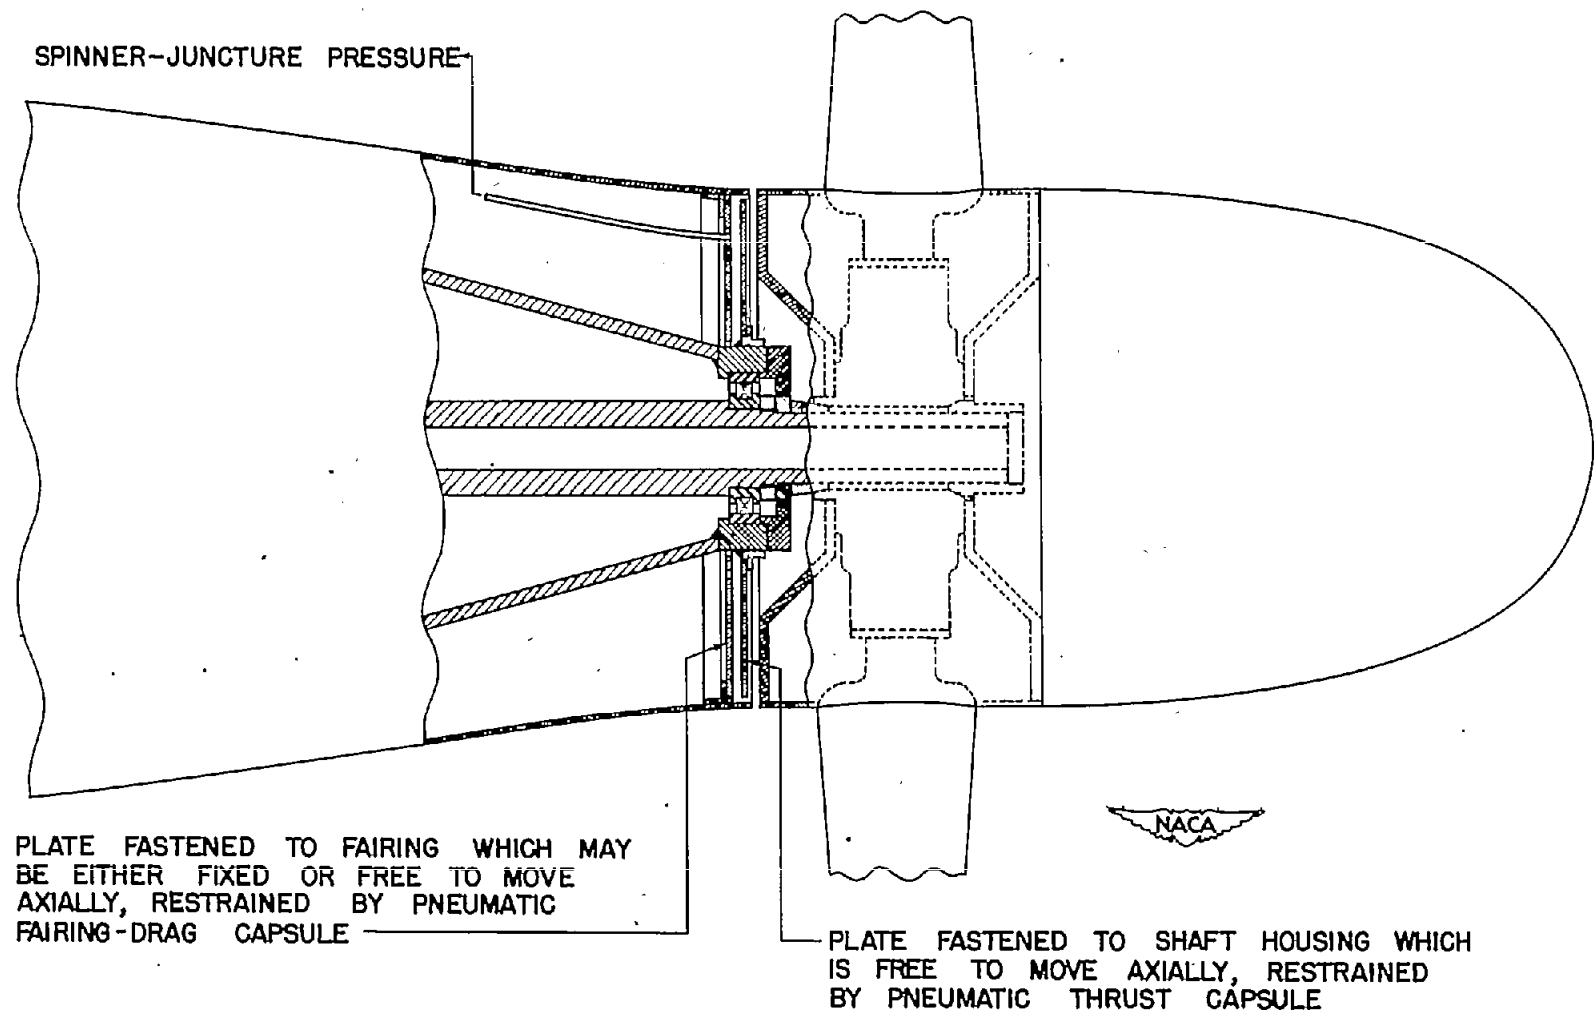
Cutaway section showing arrangement in nose of propeller dynamometer.
